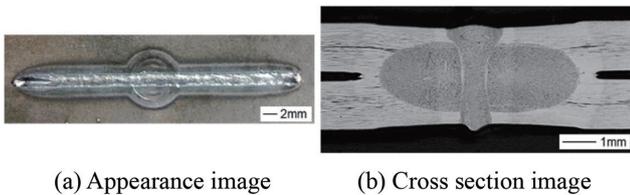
Appearance and cross section images of spot and laser welded joint
